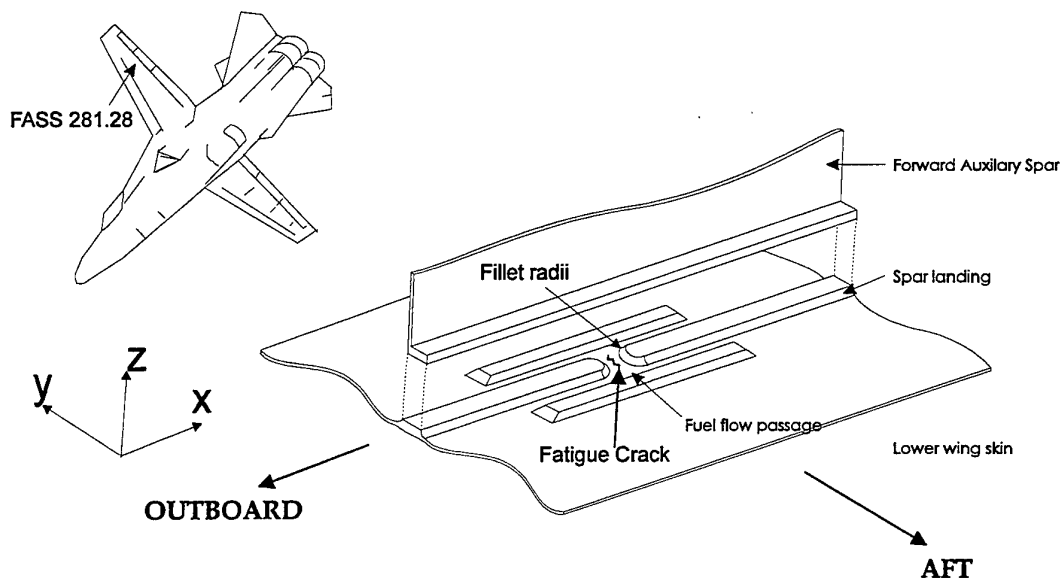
Location of Cracking in F-111 Lower Wing Skin
